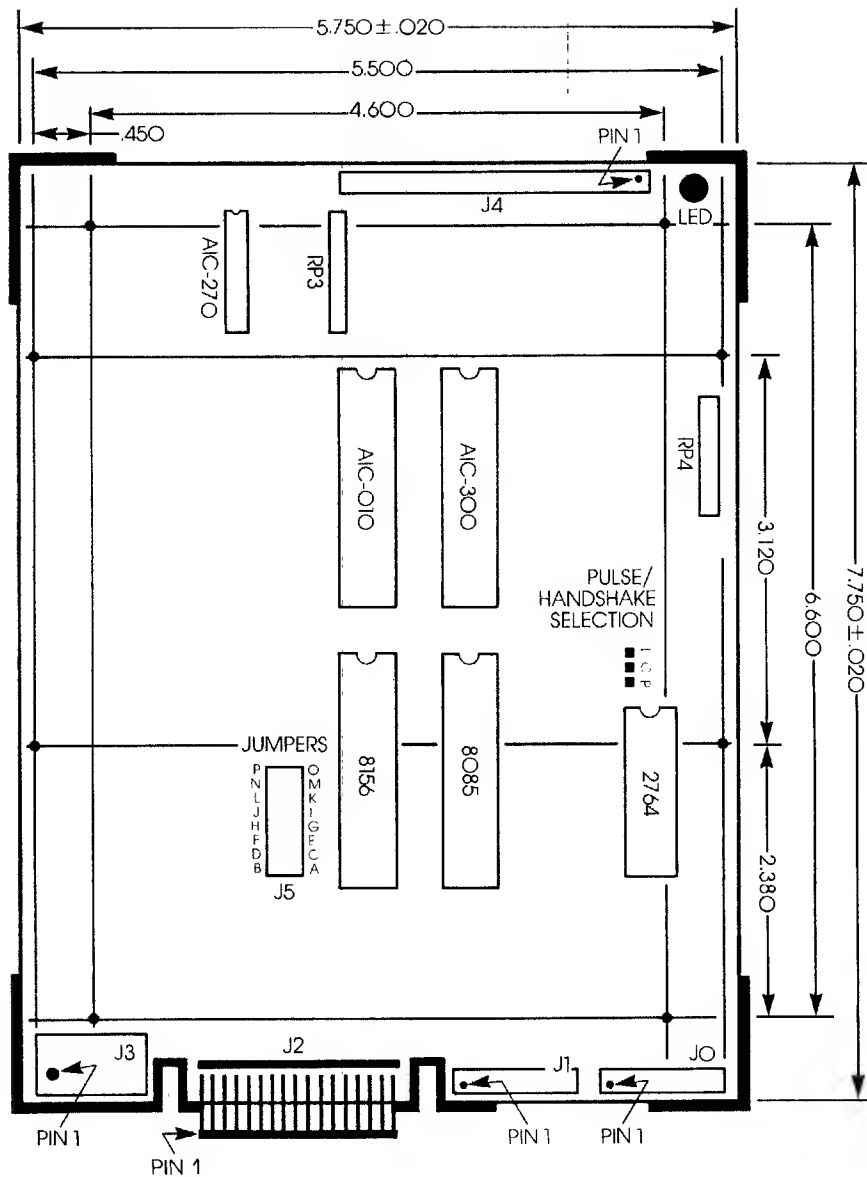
ACB-4070 BOARD LAYOUT
